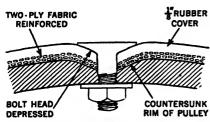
Section through a pulley showing how rubber lagging is bolted in place. Such a lagged pulley may improve the performance of a conveyor or an elevator belt.
